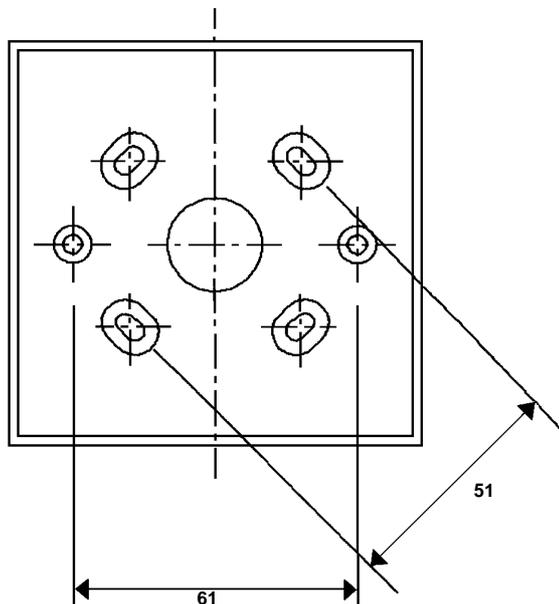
CP820/CP820M/CP820(R) Backbox Fixing Dimensions Surface Mounting
